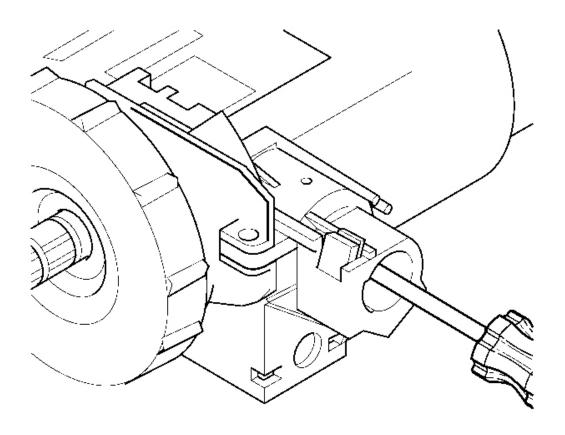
Using Screwdriver To Rotate The Lock Cylinder Housing Gear Courtesy of GENERAL MOTORS CORP.
